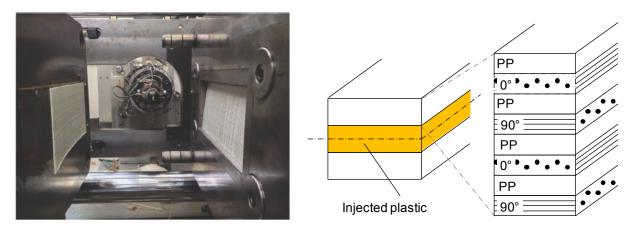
Injection mould with integrated reinforcement layers (left) and resulting sandwich structure (right)
